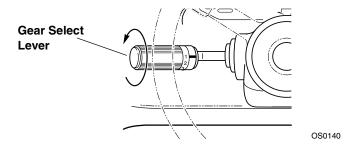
The gear select lever permits transmission gear selection (shifting).
